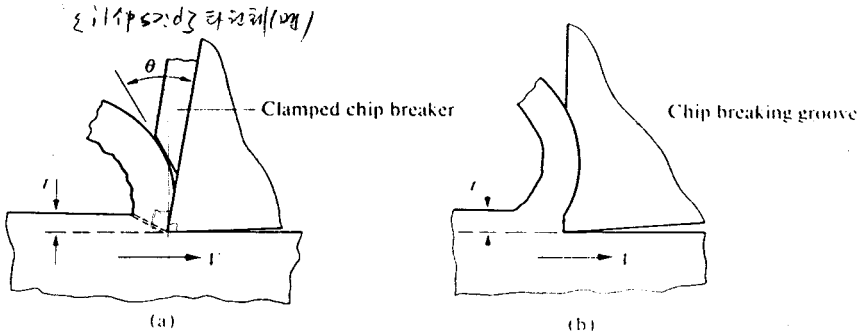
(a) Clamped chip breaker. (b) Chip-breaking groove.
